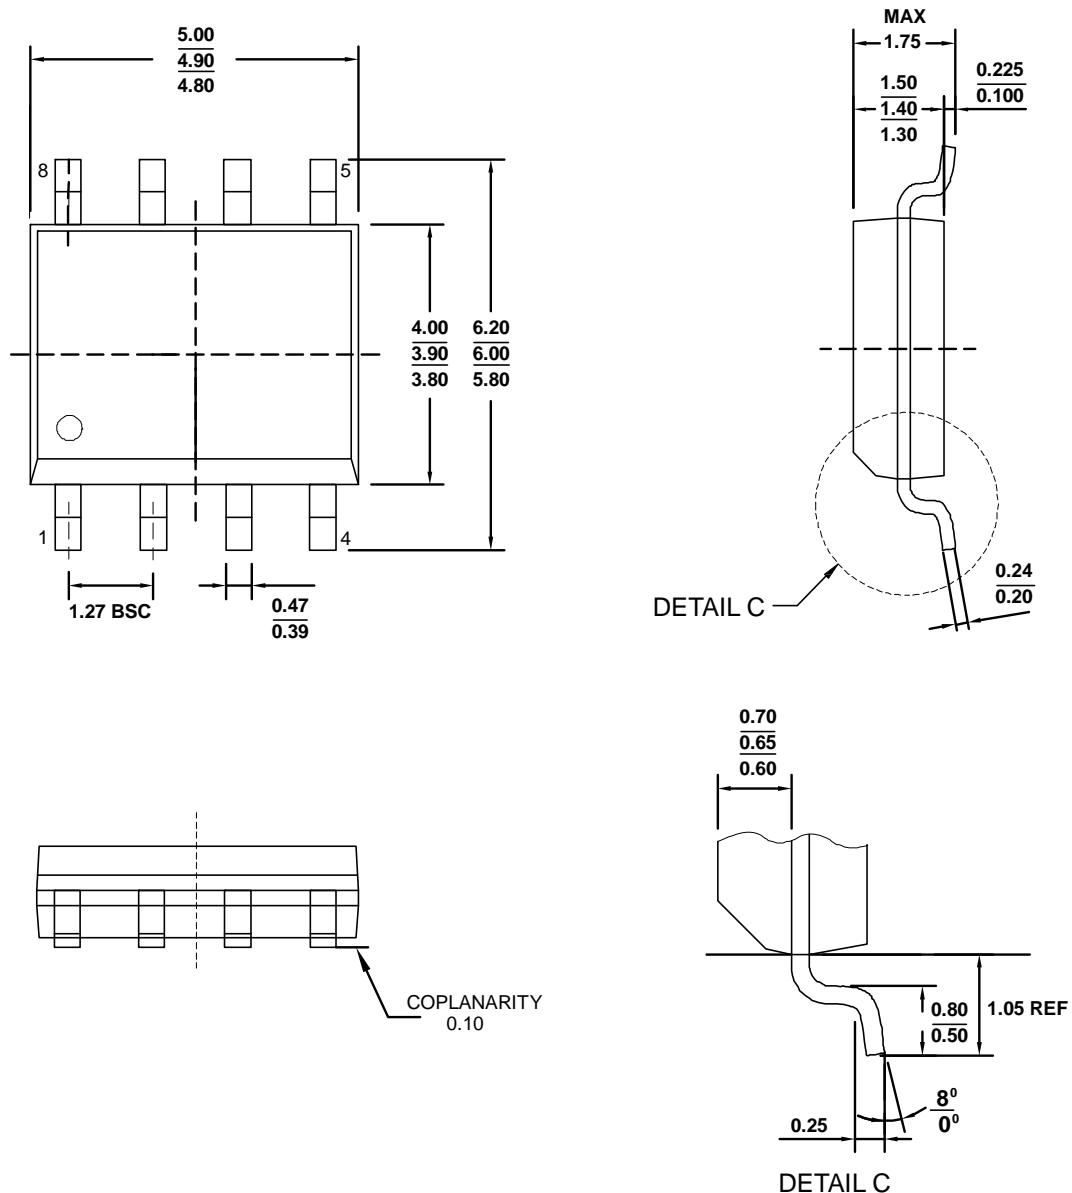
8-Lead SOIC Package Dimensions shown in millimeter
